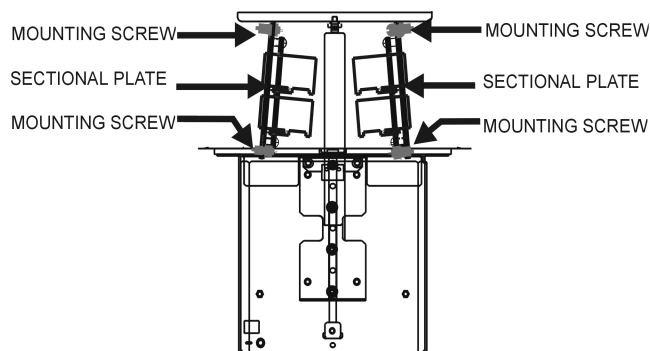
Installing Sectional Plates (Internal view of PNP400)
